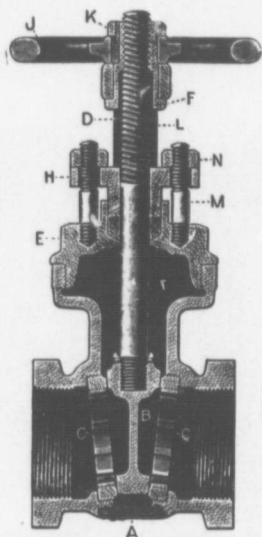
Sectional view of Valve with outside Screw and Yoke.
